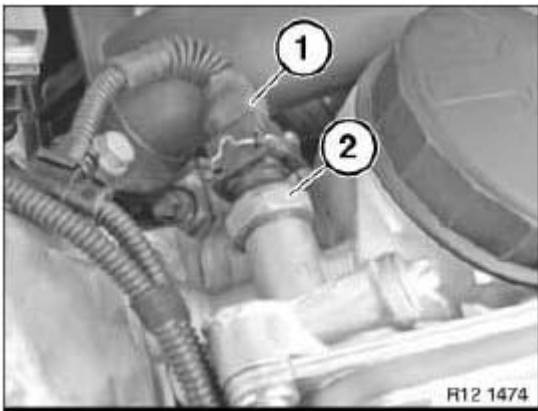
Identifying Plug Connections, Wiring Harness And Screws
